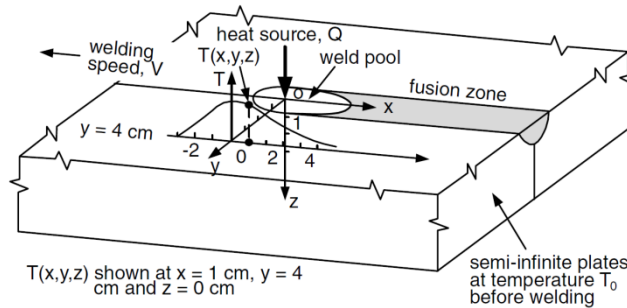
Three-dimensional heat flow of thick workpiece during welding. (2)
